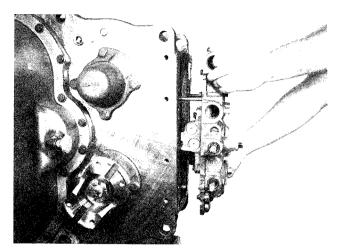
Remove control cover bolts. NOTE: Aligning studs were used to facilitate cover removal.
